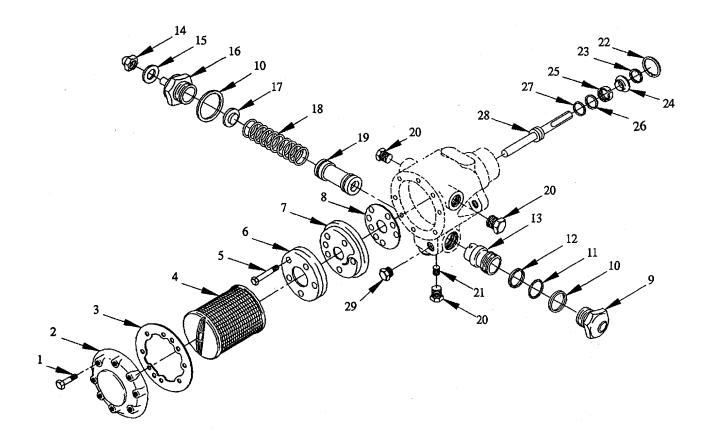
FUEL PUMP ASSEMBLY (MODEL M80)
